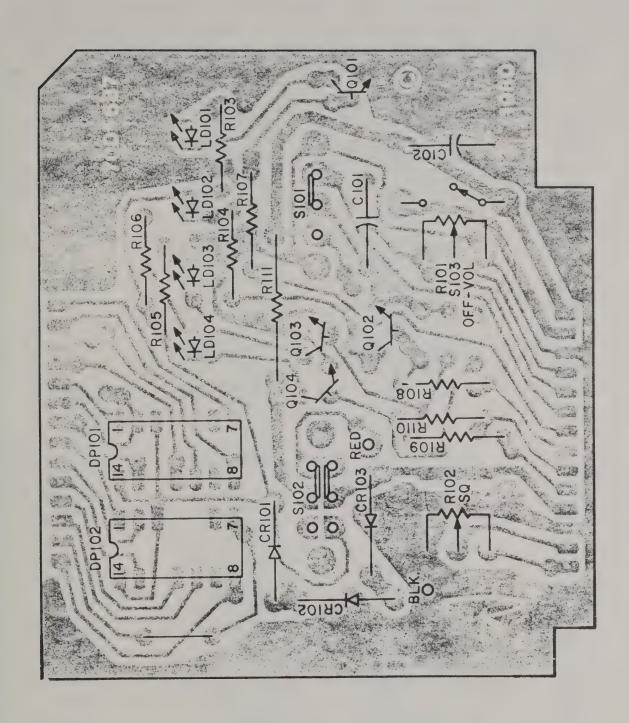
B. Parts Placement, Control PCB Assembly; Bottom View.
